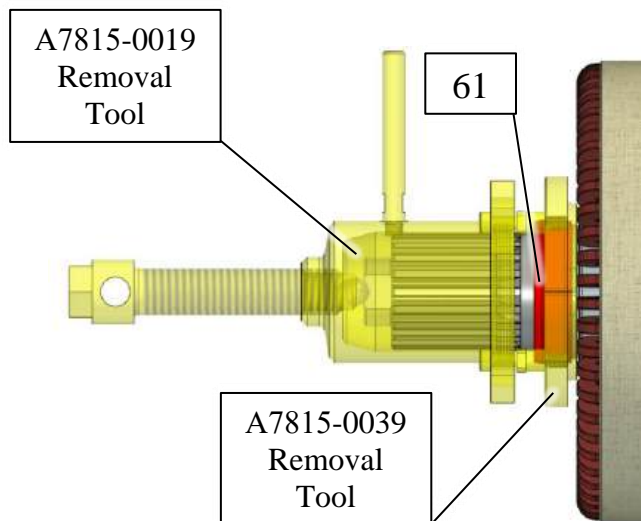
Removing Inner Ring of Drive Side Bearing (EDP-600 and EDP-600S)
